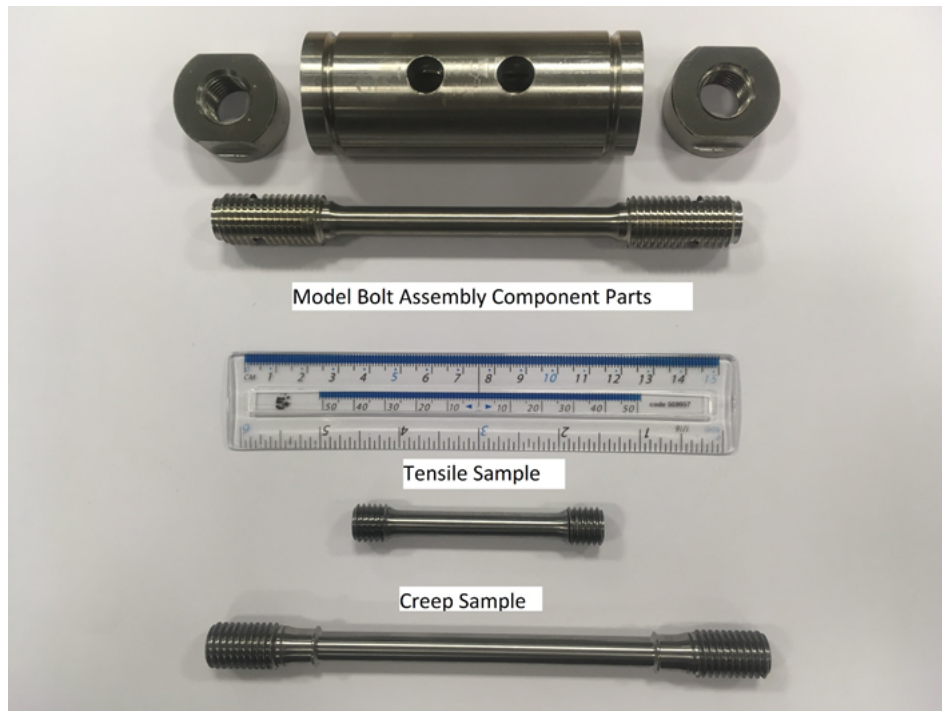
MMB assembly components compared to the other sample test pieces.
